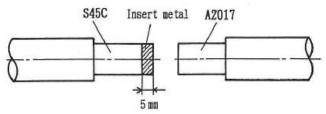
Welding design with a 5mm insert metal [13]
